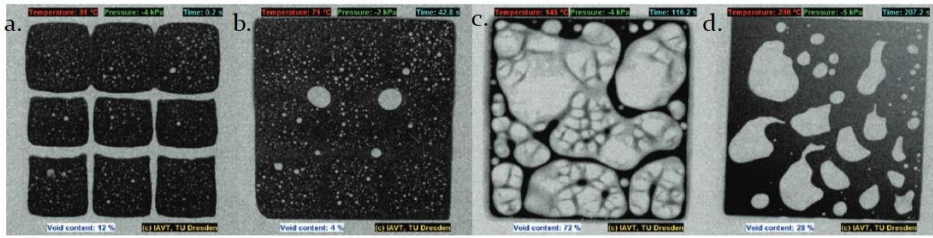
Soldering process from left to right: a. after placement, b. solving agent starts to evaporate, c. solving agent is vaporized, d. gas production after melting of solder [38]
